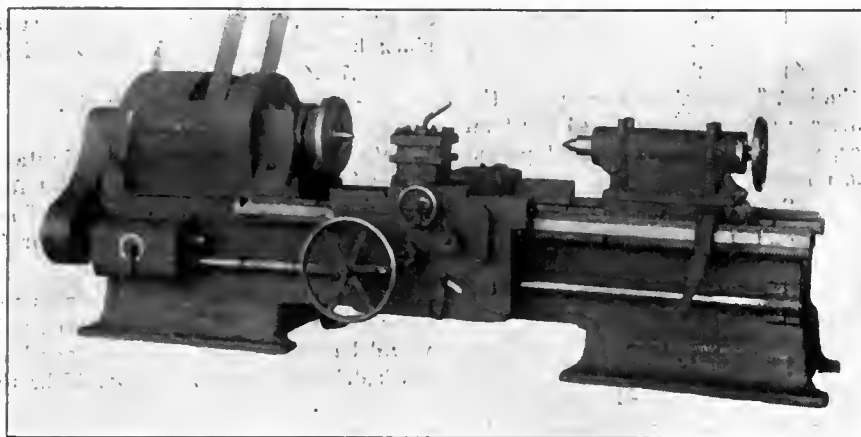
26-IN. HEAVY DUTY MANUFACTURING LATHE EQUIPPED FOR PLAIN AND SPECIAL TURNING OPERATIONS.
